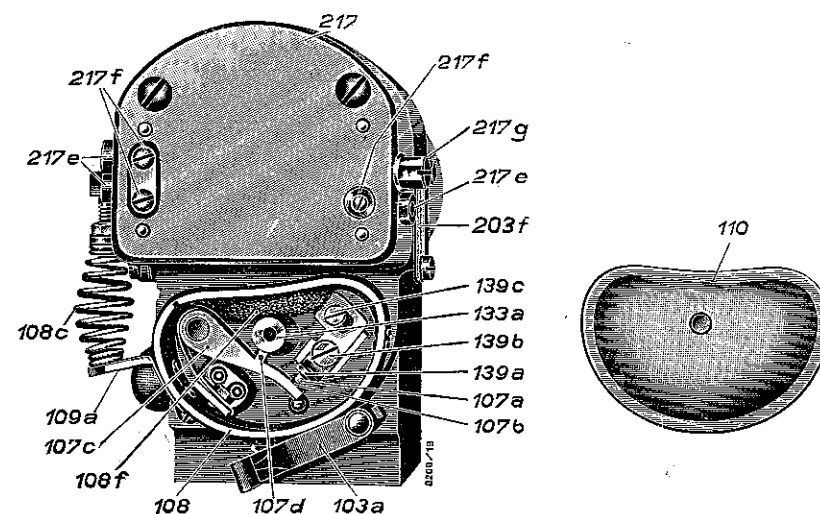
Dynamo-ignition-unit, with contact breaker cover removed
